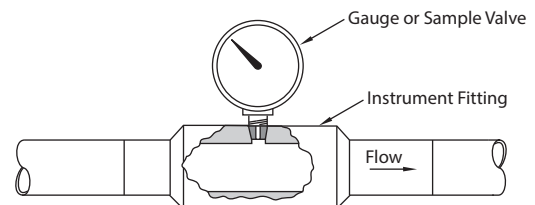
Proper use of instrument fitting to avoid dead space. Can be used with gauge guard.
